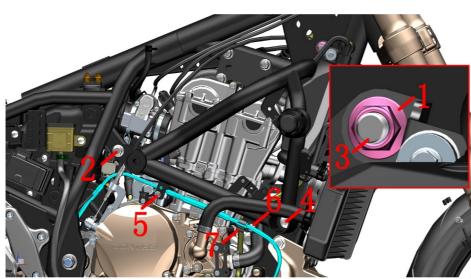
GUARD BAR COMPONENT		Guard bar assembly 2	CHK ADJ	(4)
